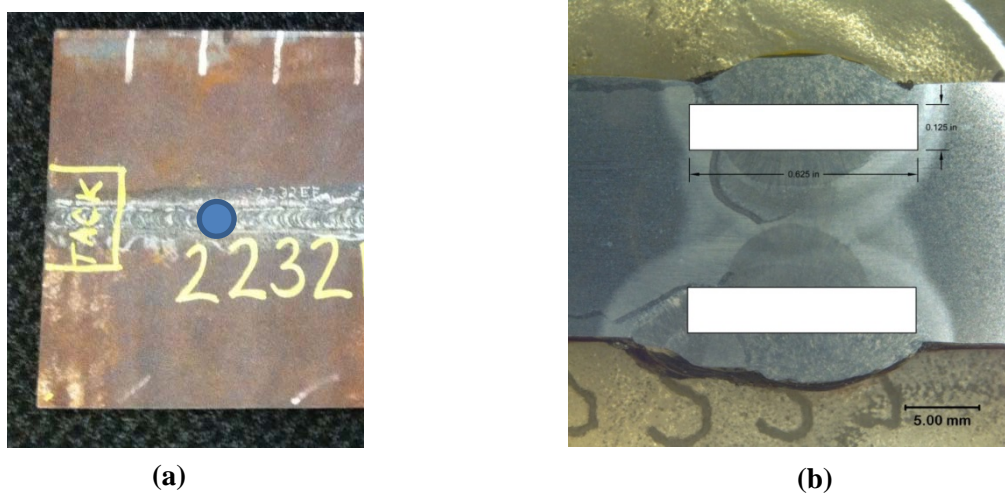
Pictures of carbon steel specimens for VSC experiments: (a) representation of the selection of the specimens in the panel (blue circle) and (b) side view of the panel and representation of the selection in the weld (white rectangles)
